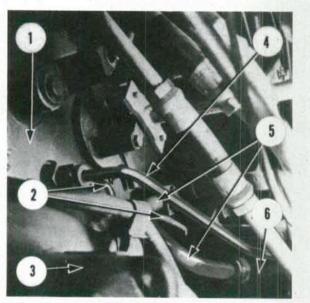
Hydraulic lift cover linkage and tubes as viewed from rear of pump adapter plate.
